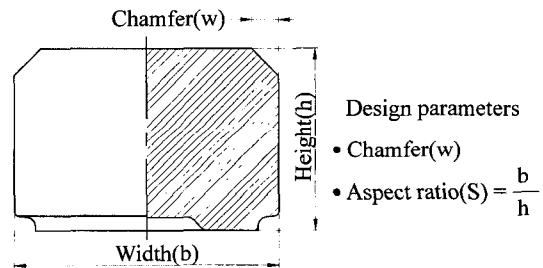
Design parameters for 2nd preform shape of bevel gear
